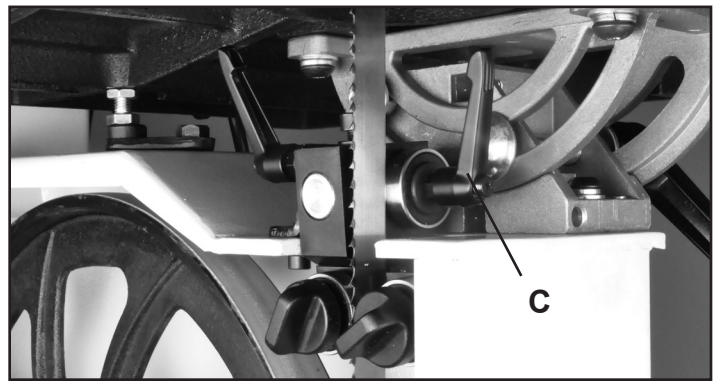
NOTE: Blade Guard removed for photo purposes
